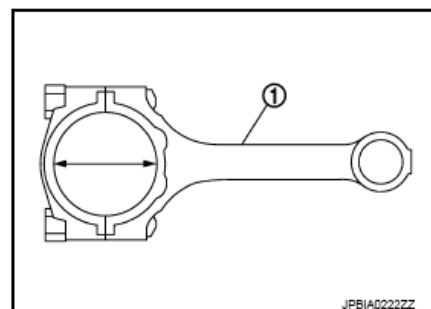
Identifying Connecting Rod With Bigger End Diameter
